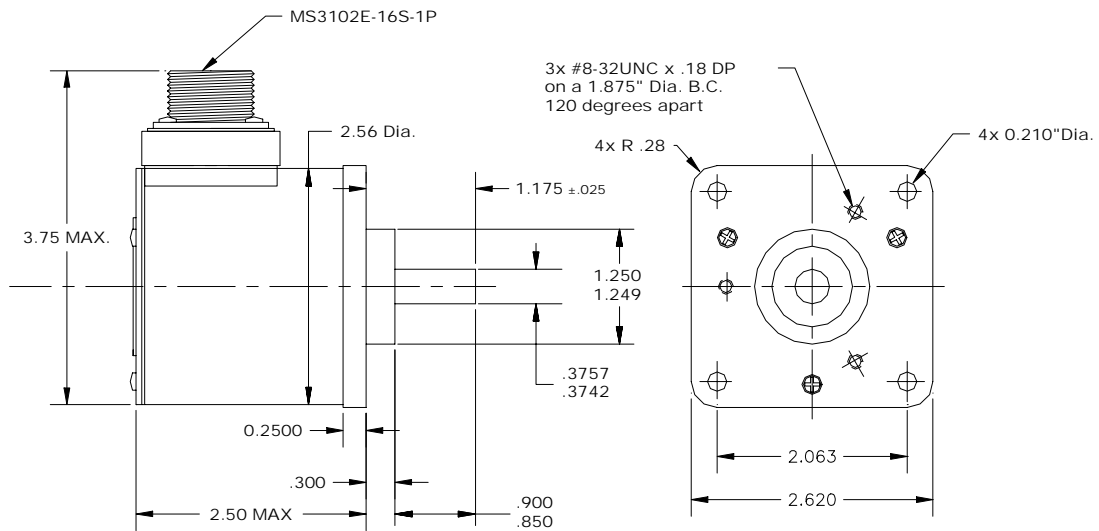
Industrial Brushless Resolver - Flange Mounting (P/N 3000-01)
